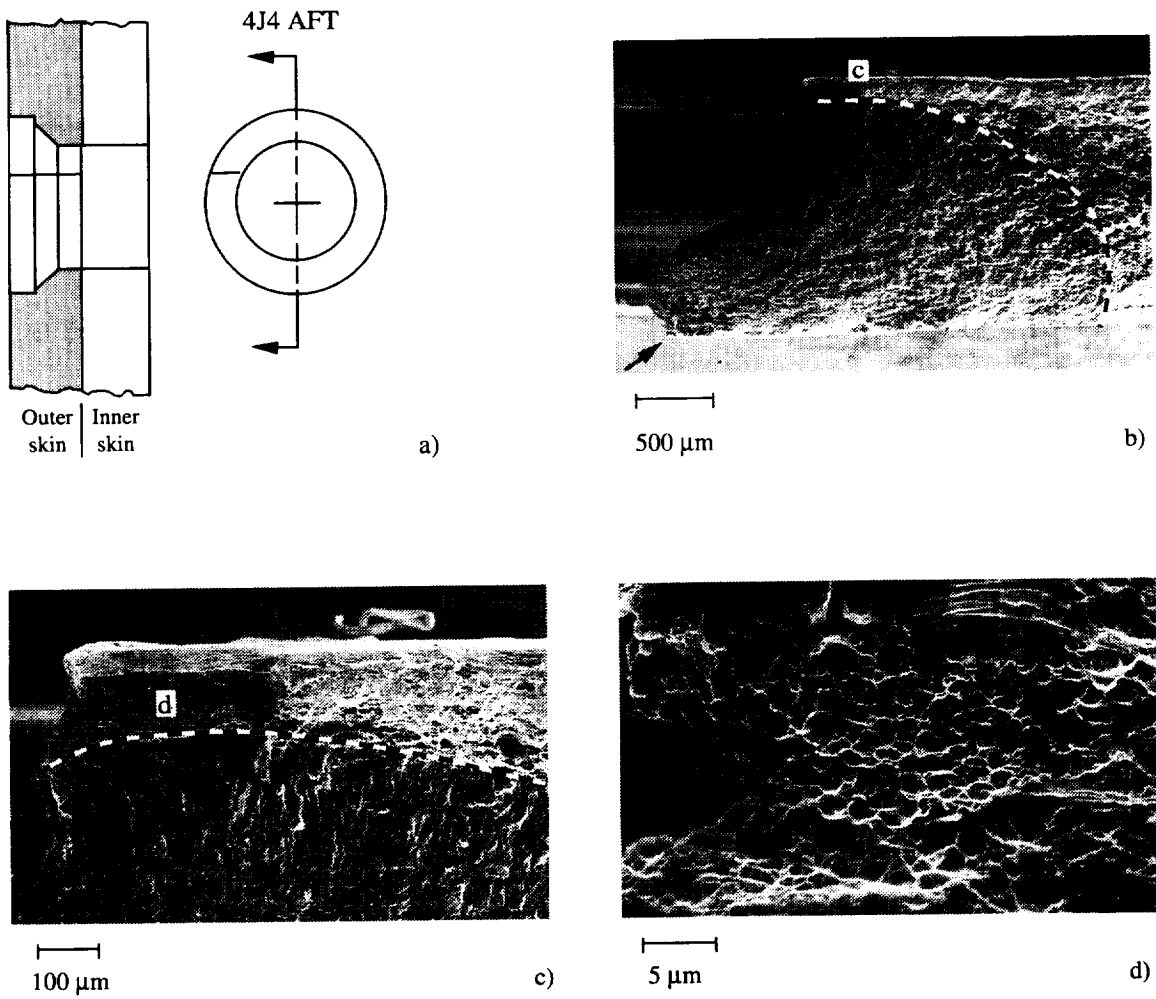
a) The schematic shows the rivet hole 4J4 configuration and the location of the outer skin fatigue crack oriented in the aft direction and about the 10 o'clock position. b) The SEM micrograph shows the fatigue crack fracture surface located at the outer skin rivet hole (left). The arrow marks the likely region of crack initiation and the dashed line marks the fatigue crack front. c) The SEM micrograph shows the fatigue crack front and the ligament, region "c" in Figure 11.15.b. The dashed line marks the fatigue crack front where it intersects the rivet hole (left). The outboard surface of the outer skin is located at the top of the micrograph. d) The SEM micrograph shows the ductile morphology of the overload fracture surface at region "d" in Figure 11.15.b at high magnification.
